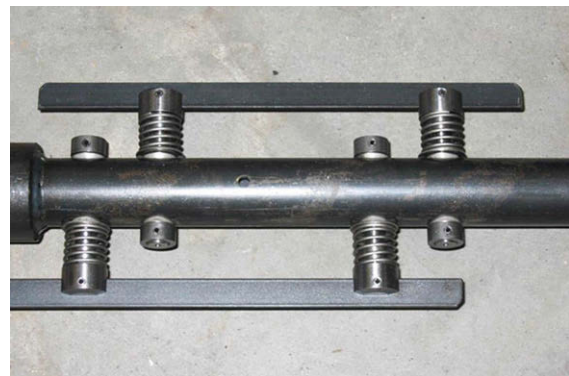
Standard design of a scraper shaft as used for lube oil dewaxing in an SSE. (Photo courtesy of BORSIG)
